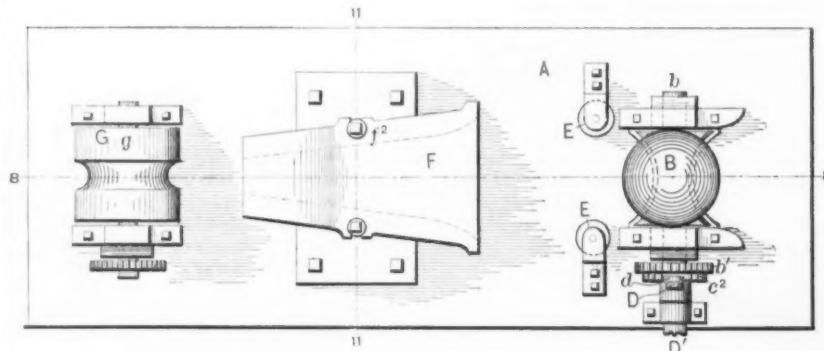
Plan View of Apparatus for Making Wrapped Steel.
